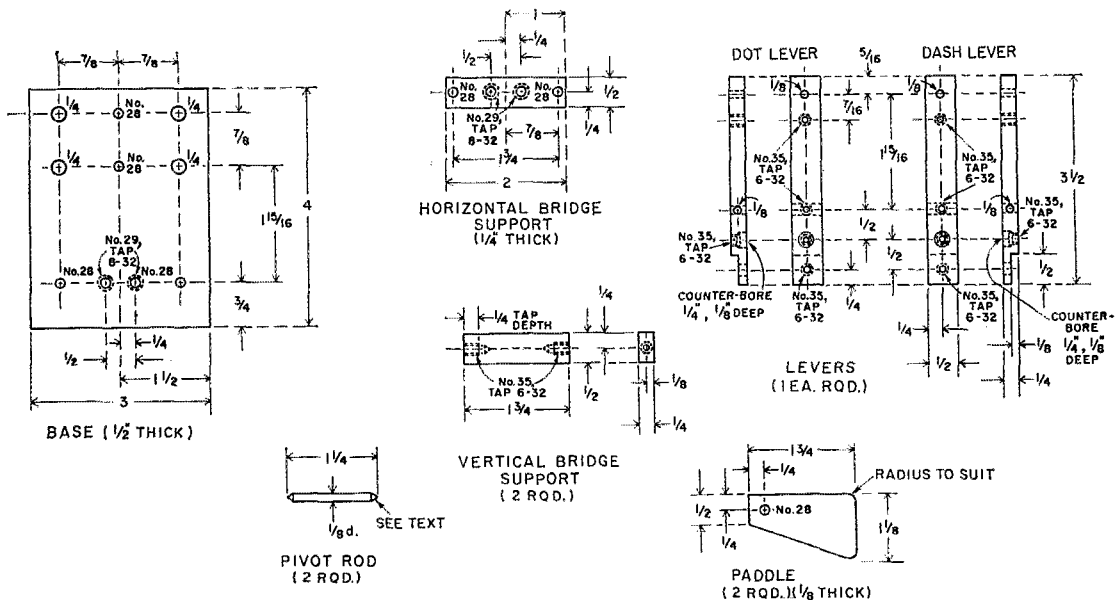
Sketch showing details and dimensions of components required for the Nikey.
